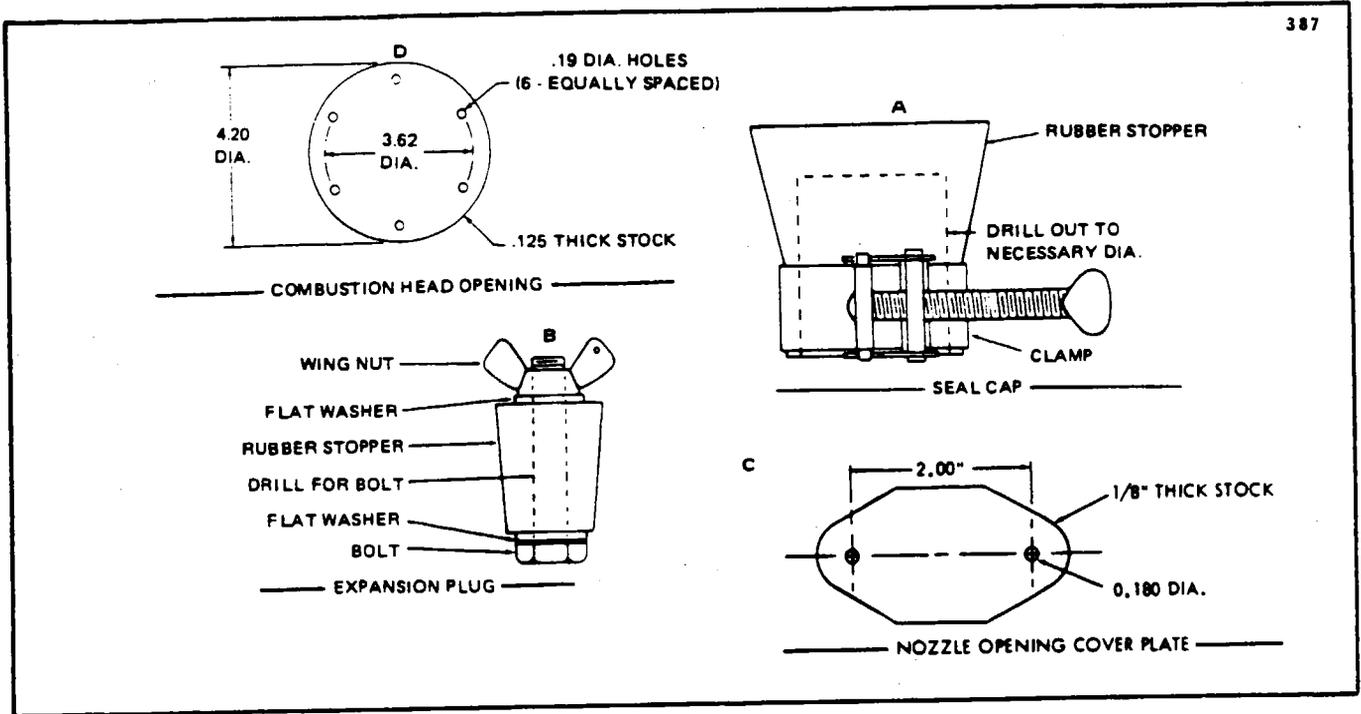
Plugs And Caps For Combustion Tube Leak Test
